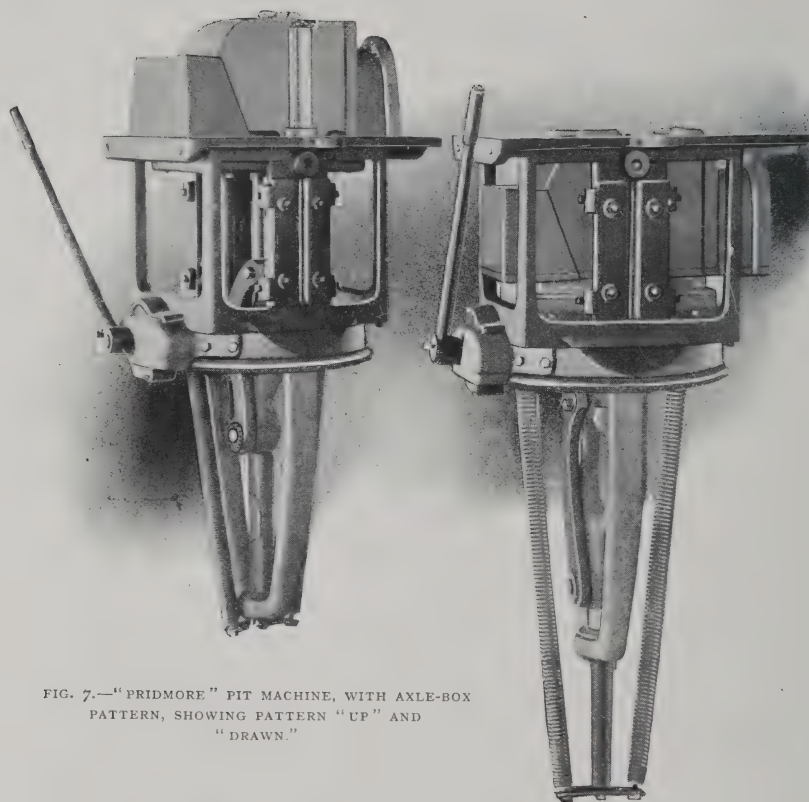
"PRIDMORE" PIT MACHINE, WITH AXLE-BOX PATTERN, SHOWING PATTERN "UP" AND "DRAWN."
